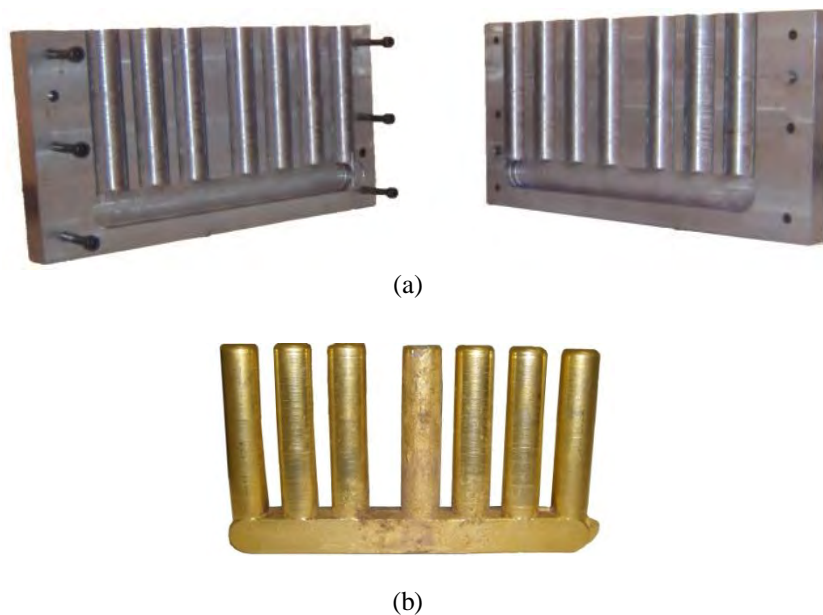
Workpiece Casting: (a) Permanent Mold and (b) As-cast specimens.
